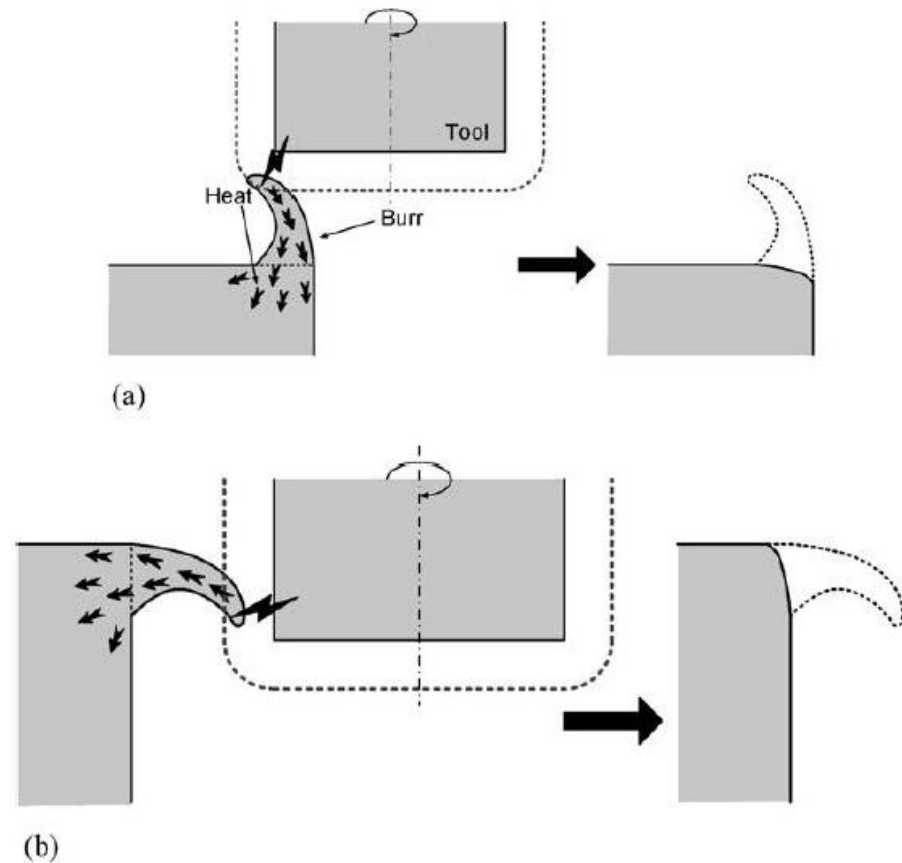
Concept of micro-EDM deburring: deburring on the (a) top plane and (b) side plane of the edge.
